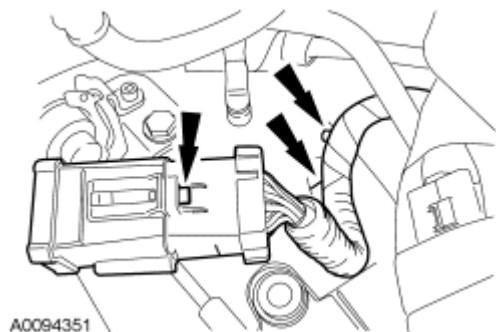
Locating 16-Pin Electrical Connector & Wiring Retainers
